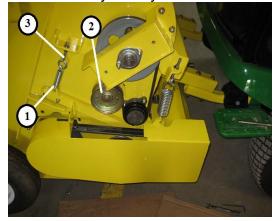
LH Side of Header Key 1 – Spring Key 2 – Tensioner Pulley Key 3 – Eye Bolt
